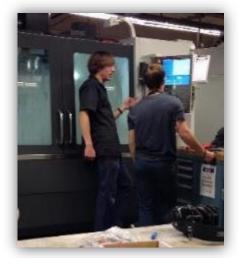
ALEC BIALEK (LEFT) AND CARTER WILSON (RIGHT) WORKING ON THE CNC MACHINE.
